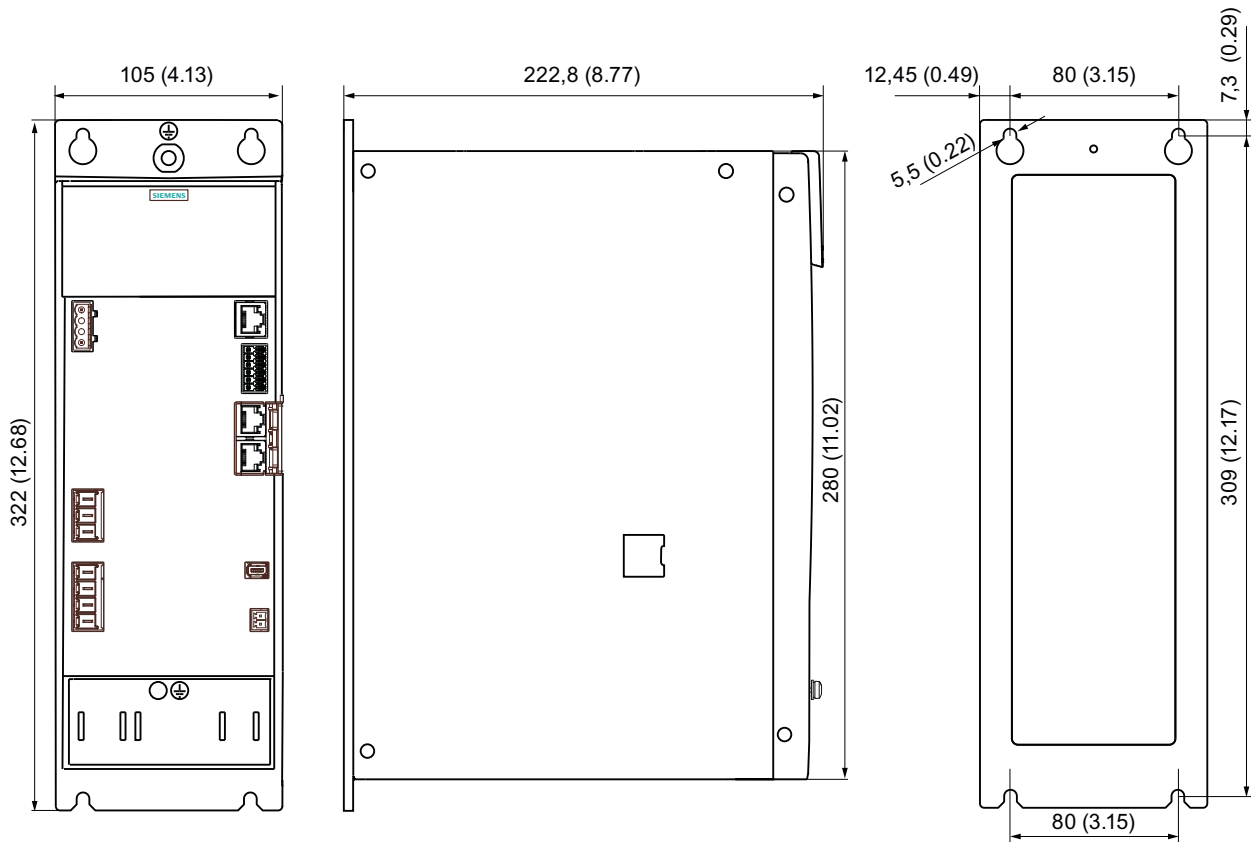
Dimension drawing SINAMICS S210 FSC, 3 AC, dimensions in mm (inch)
